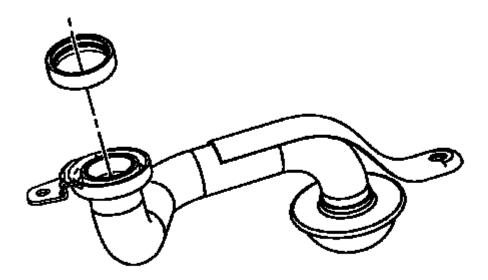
Locating Oil Suction Tube Seal Courtesy of GENERAL MOTORS COMPANY
